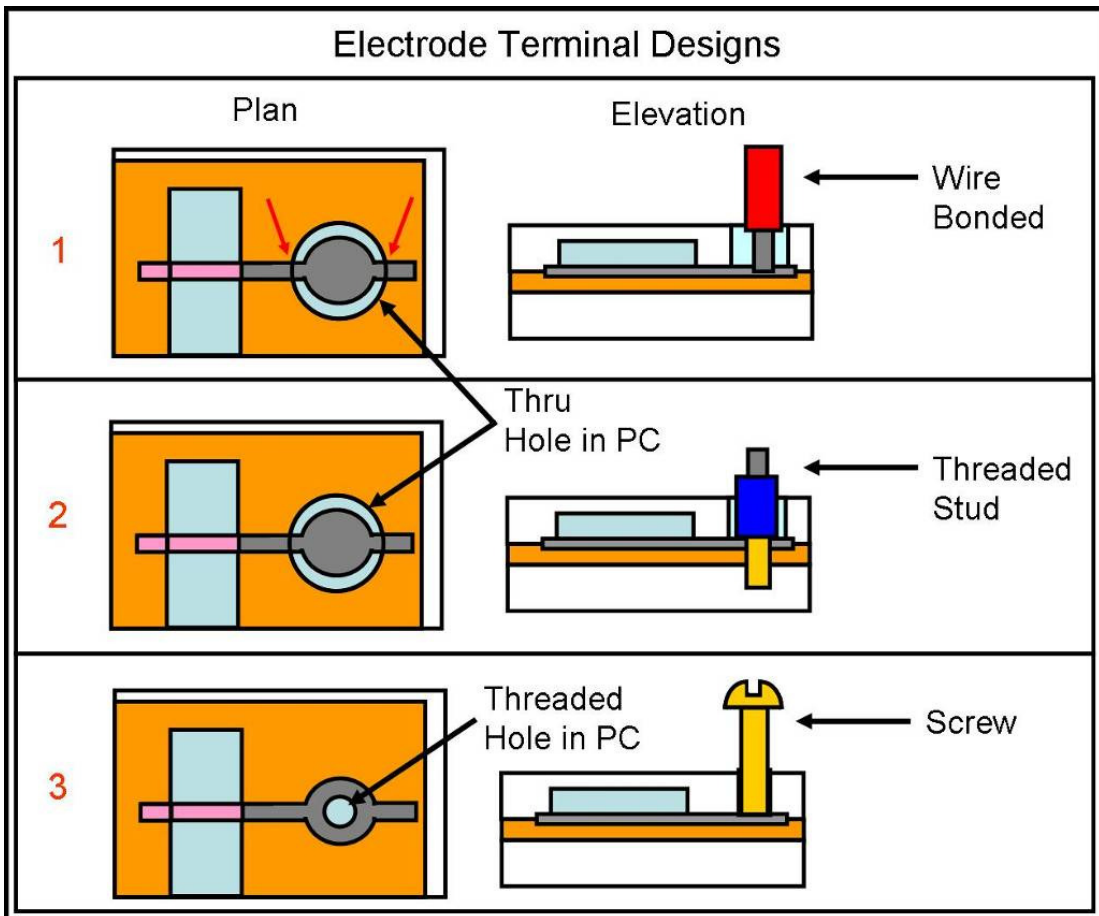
Electrode terminal designs. Design 1 consist of a wire bonded to the Ag trace using epoxy. Design 2 utilized a threaded stud seated against the Ag trace, and the final design utilizes a screw that bottoms out when inserted into a threaded hole. Design 3 was ultimately chosen.
